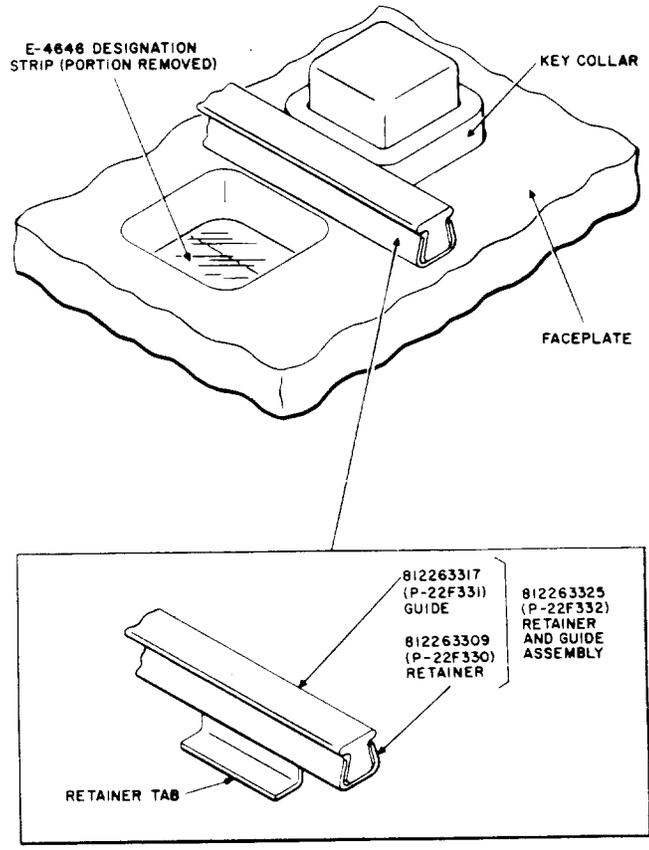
812263325 (P-22F332) Retainer and Guide Assembly—Enlarged Cutaway End View
